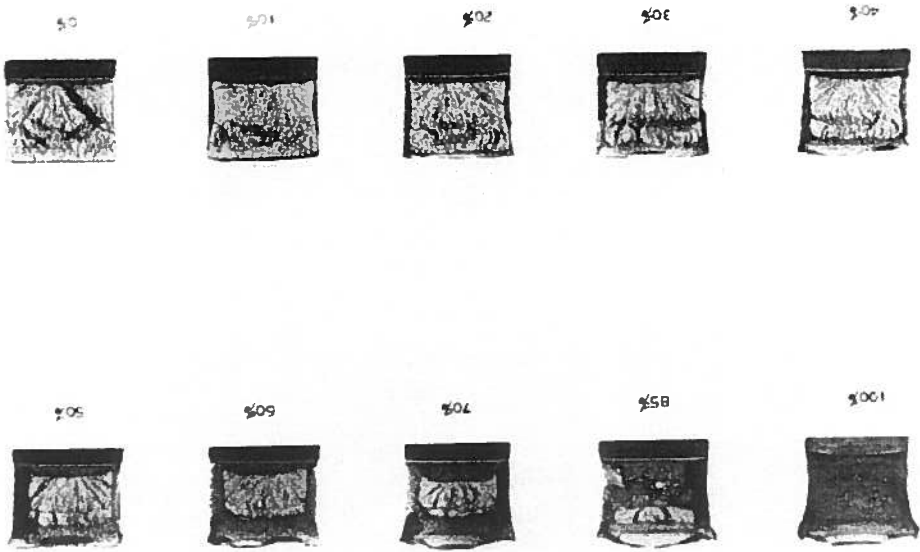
Fracture Appearance Charts and Percent Shear Fracture Comparator
